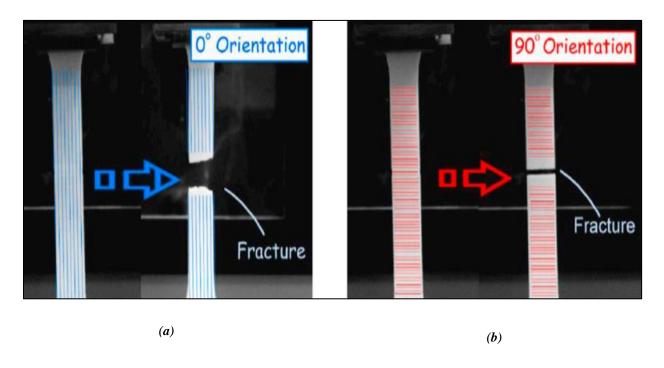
(a) Actual fracture of a 0° oriented test specimen; (b) Actual fracture of a 90° oriented test specimen. [29]
